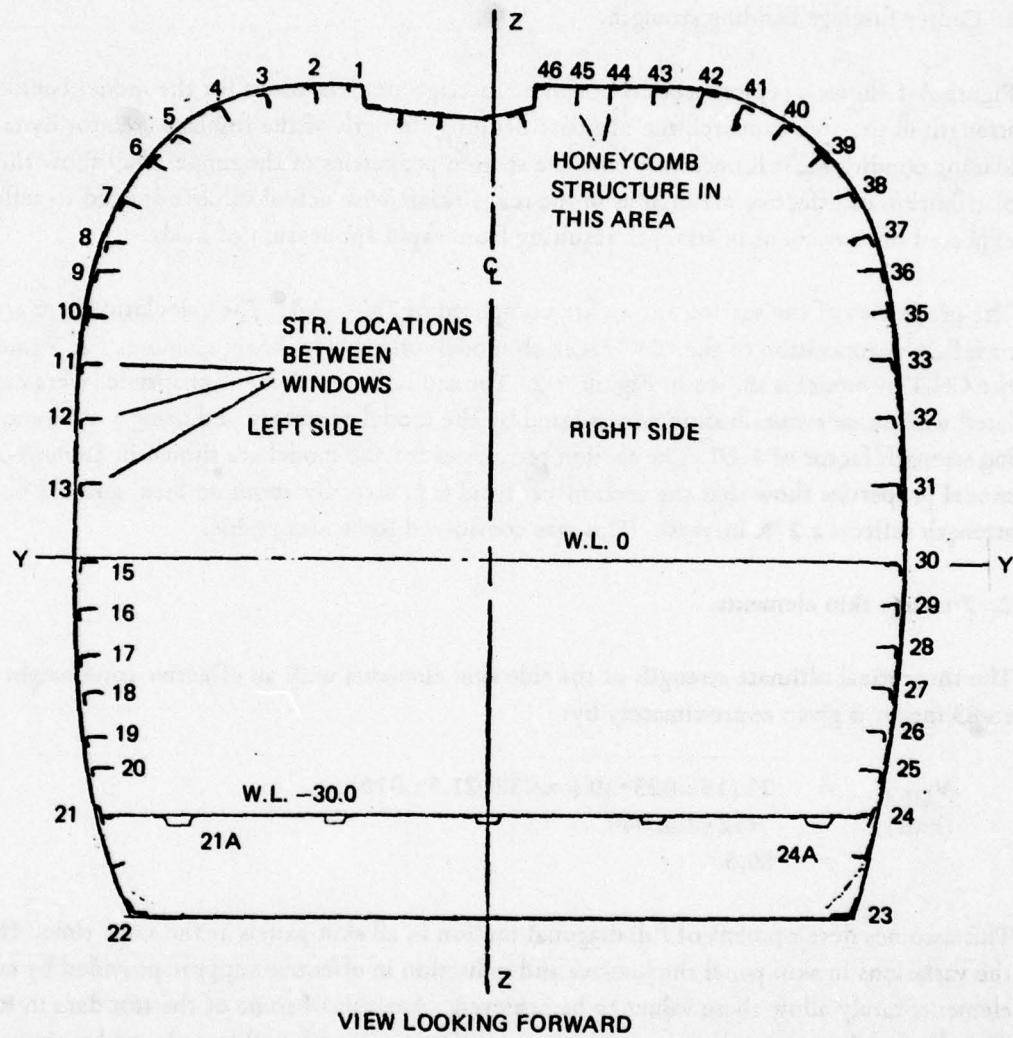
Typical Cross Section of the CH-47A Center Section Showing Stringer Location, F.S. 160 to F.S. 440.
